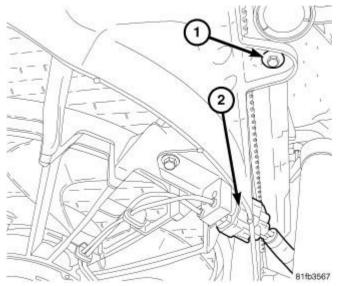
Electrical Fan Connector & Bolt Courtesy of CHRYSLER LLC
